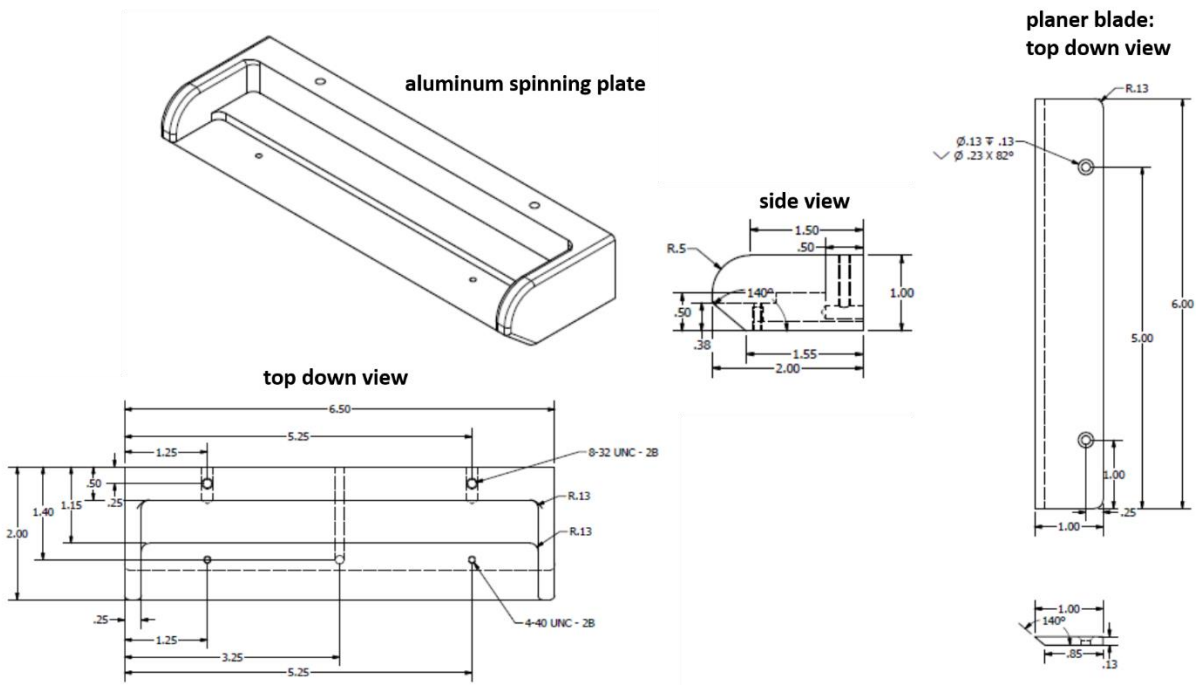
Drawings of the source plate and planer blade. Dimensions are given in inches.
